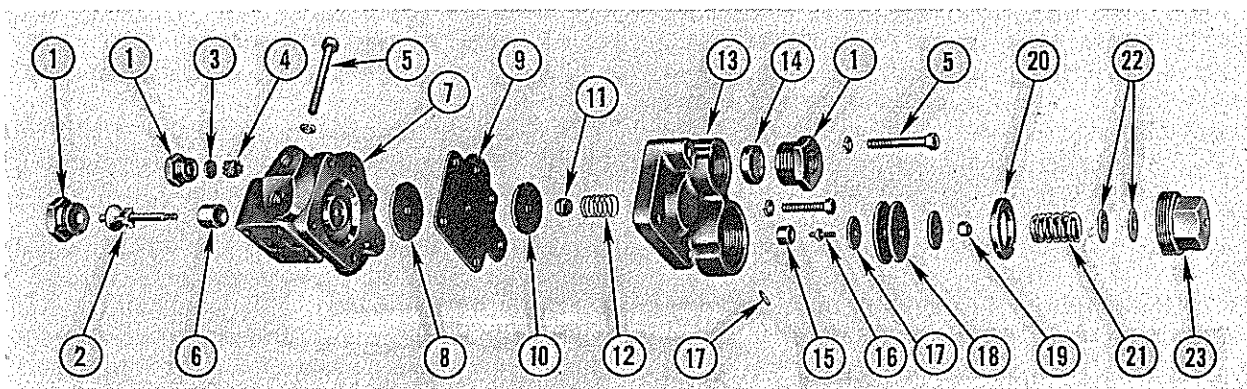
EMERGENCY VALVE, EXPLODED
